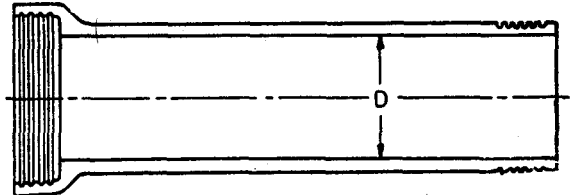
HALF-SECTION STRAIGHT CHANNEL
